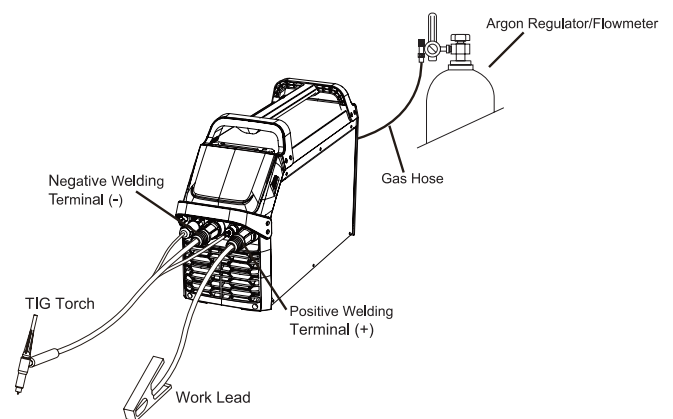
Setup For TIG (GTAW) Welding
